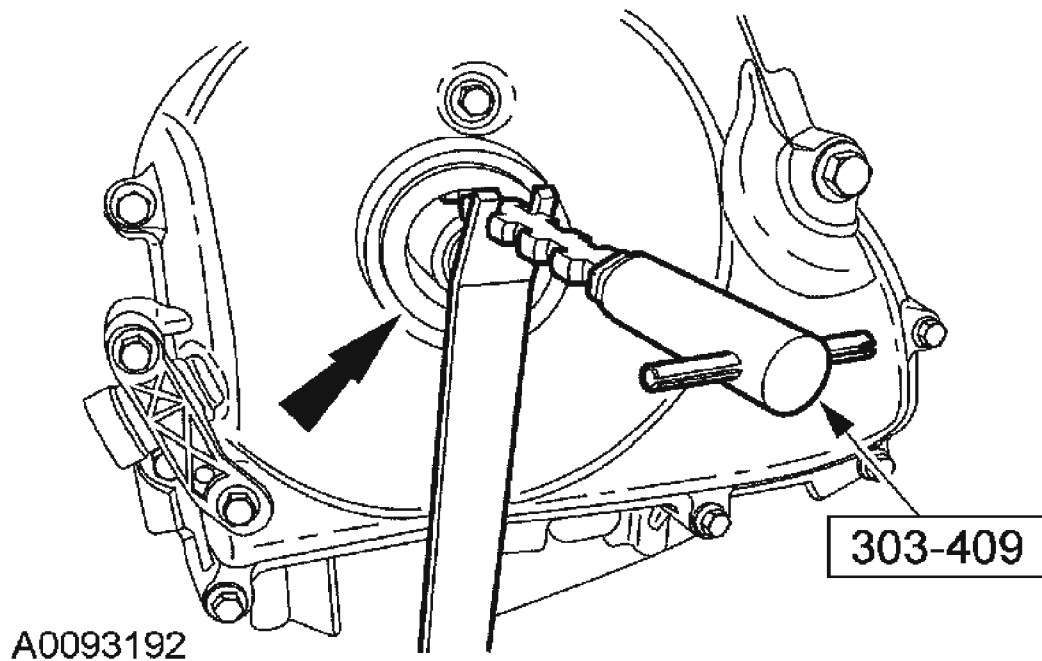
Removing Crankshaft Front Oil Seal Using Special Tool
